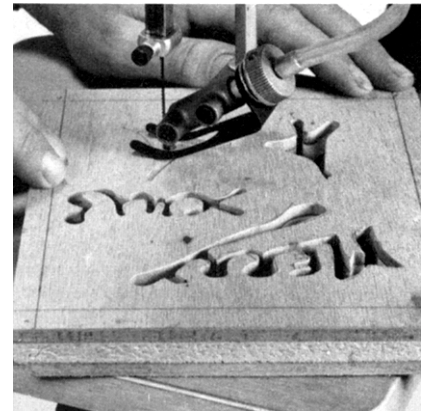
A pad of paper can be cut on the jigsaw; but, to avoid jagged edges, the sheets must be
